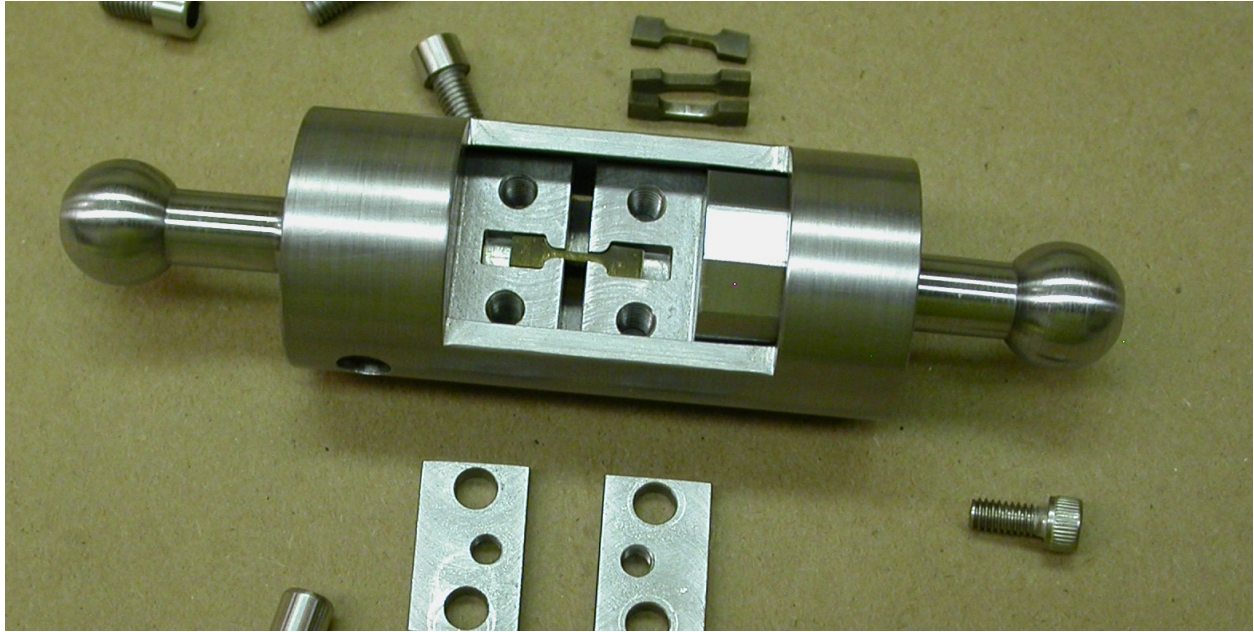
Ball end tensile grips for shoulder loading samples with or without center hole.
